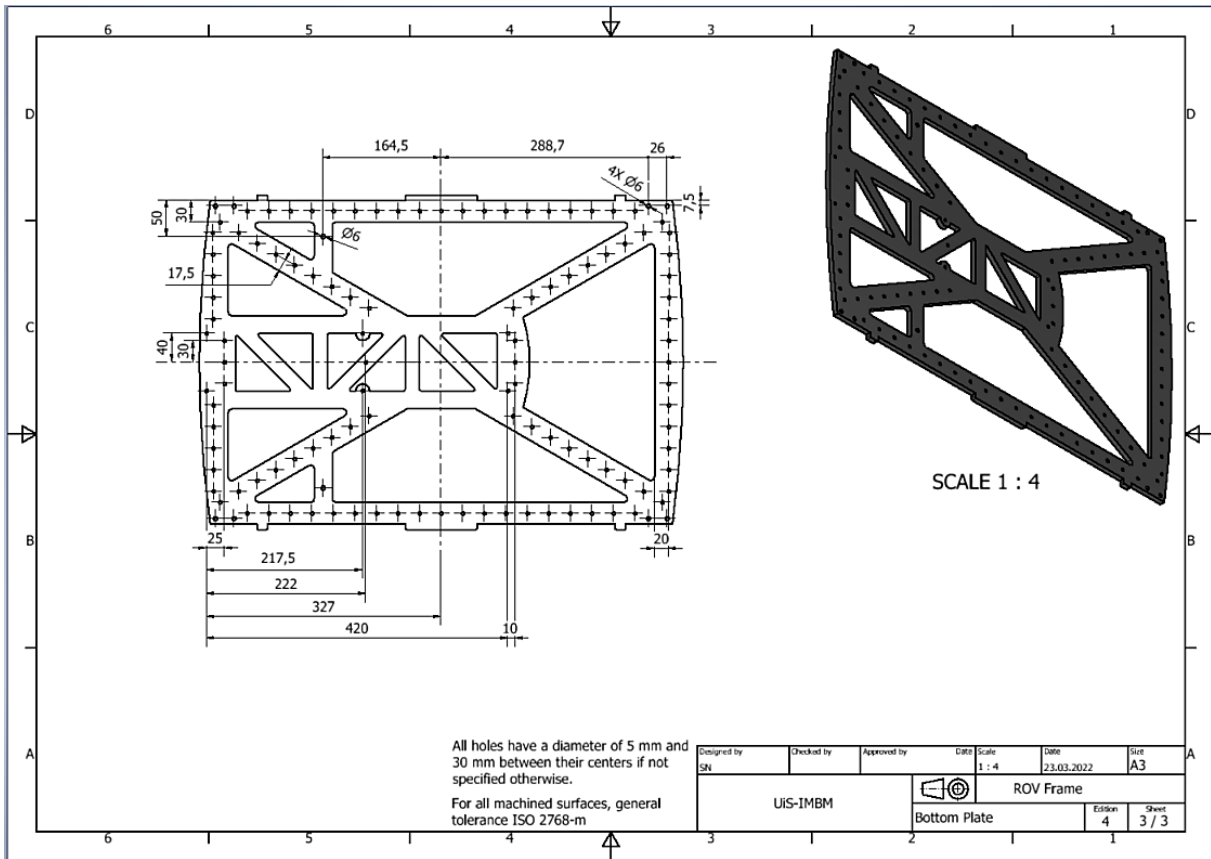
Technical drawing of the bottom plate sheet 3/3
